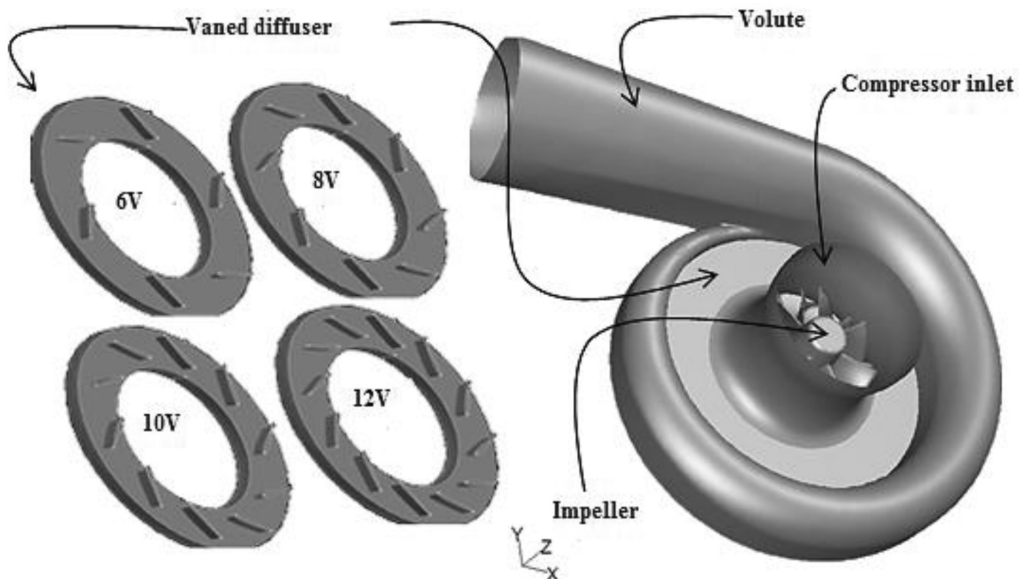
Geometry model of vaned and vanless diffuser turbocharger compressor
